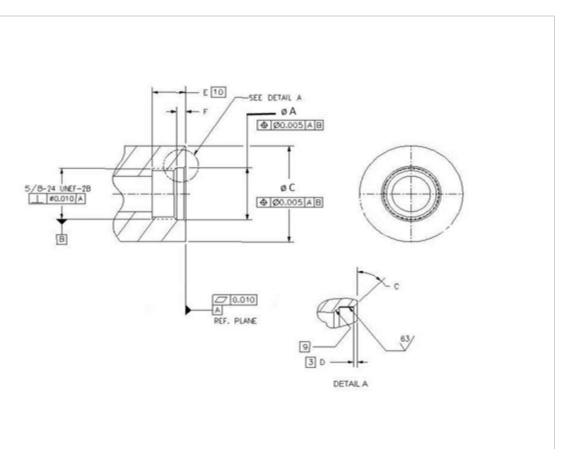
Physical Dimensions for 5/8-24 Port, Adapter Female
